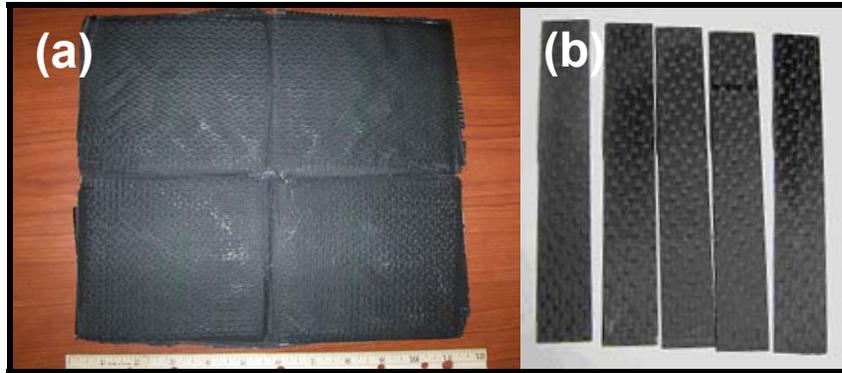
(a) R-CFRP panels fabricated via the VARTM process, (b) waterjet cut test specimens
